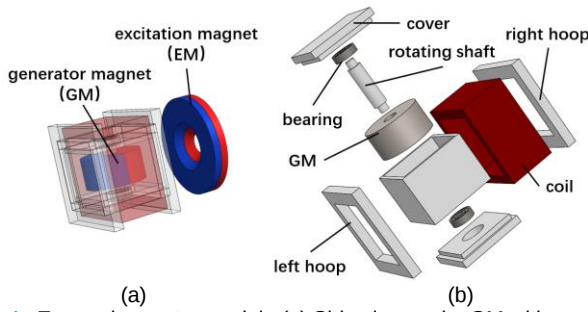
Energy harvester module (a) Side view and a GM with an external orbiting EM; (b) Exploded view of the proposed energy harvester module.
